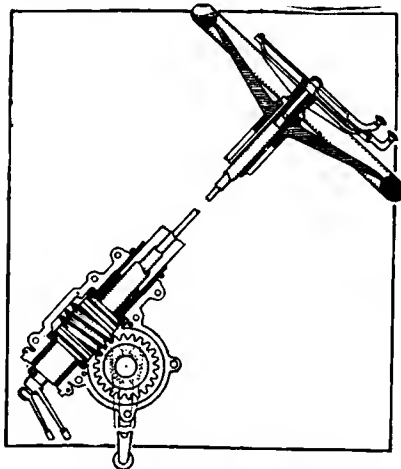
Section of steering column, showing concentric parts for advancing spark, and throttle.
